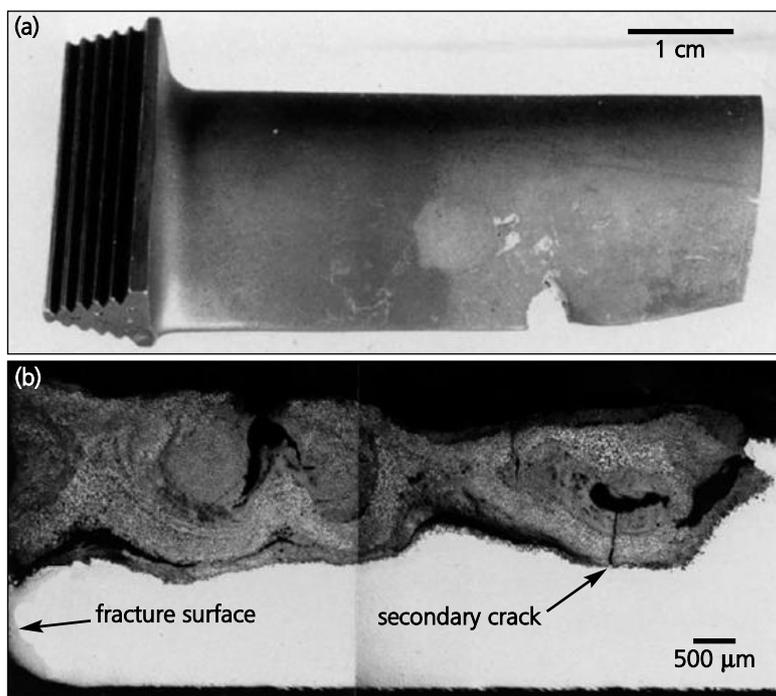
(a) Macroscopic view of a NBSA turbine blade, showing the loss of a large piece of material along a fracture running perpendicular to the leading edge; (b) Optical micrograph of a cross-section through the origin of the fracture, indicating advanced hot corrosion attack, with a secondary crack propagating from the scale into the base material (9) (Images reprinted with permission from Elsevier)
